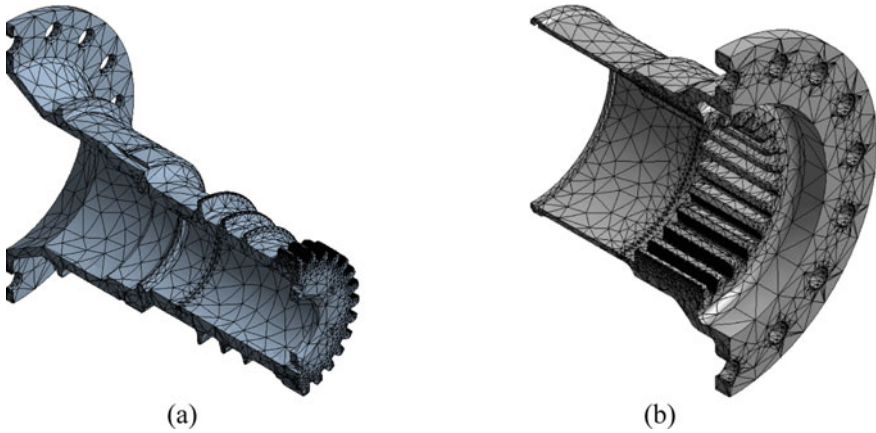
Finite-element models of tip (a) and shaft (b) (axial section)
